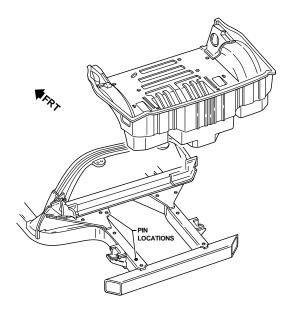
Embossed Pins in Tub that Fit the Rail
